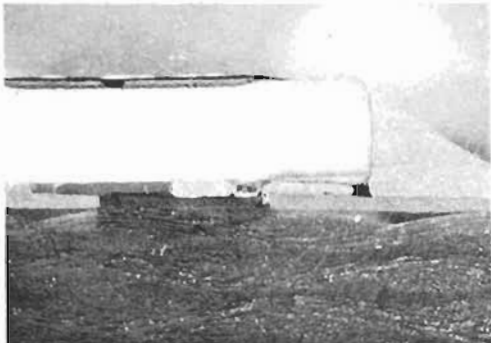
Adhesive voids under component causing solder shorts (EPS)
